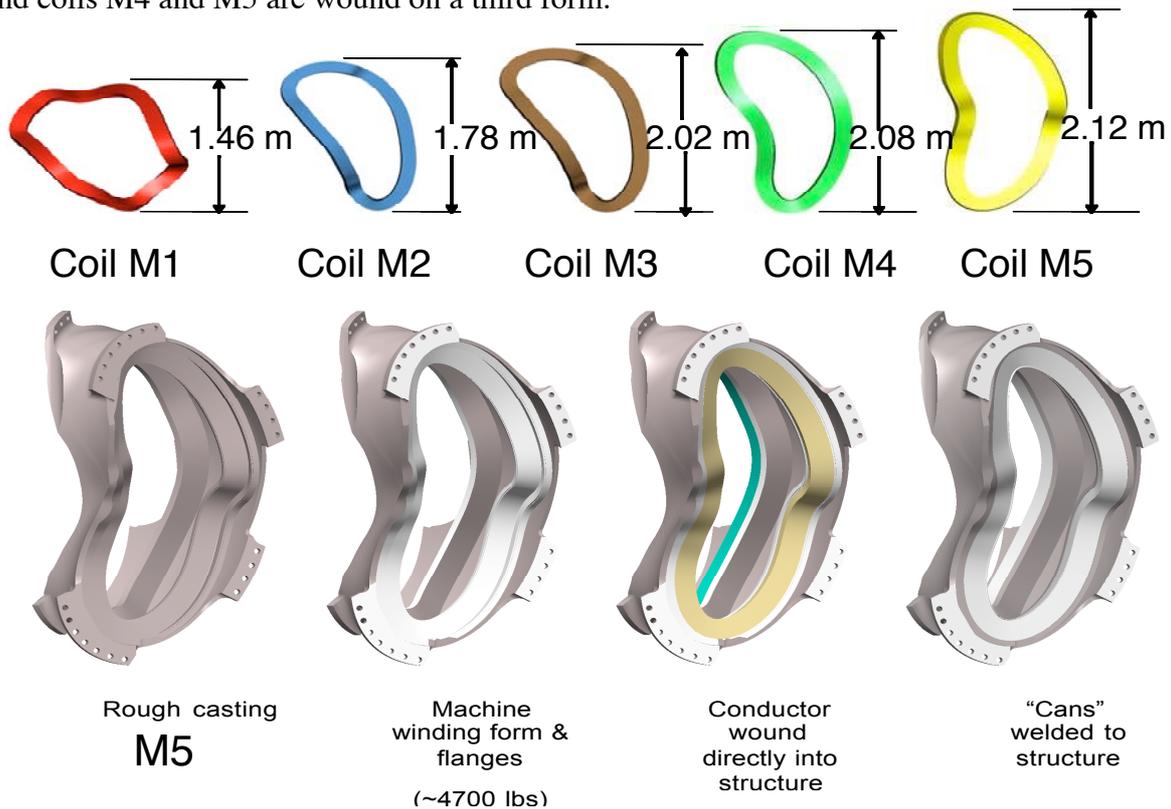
The five types of modular coils and the fabrication steps after machining.
